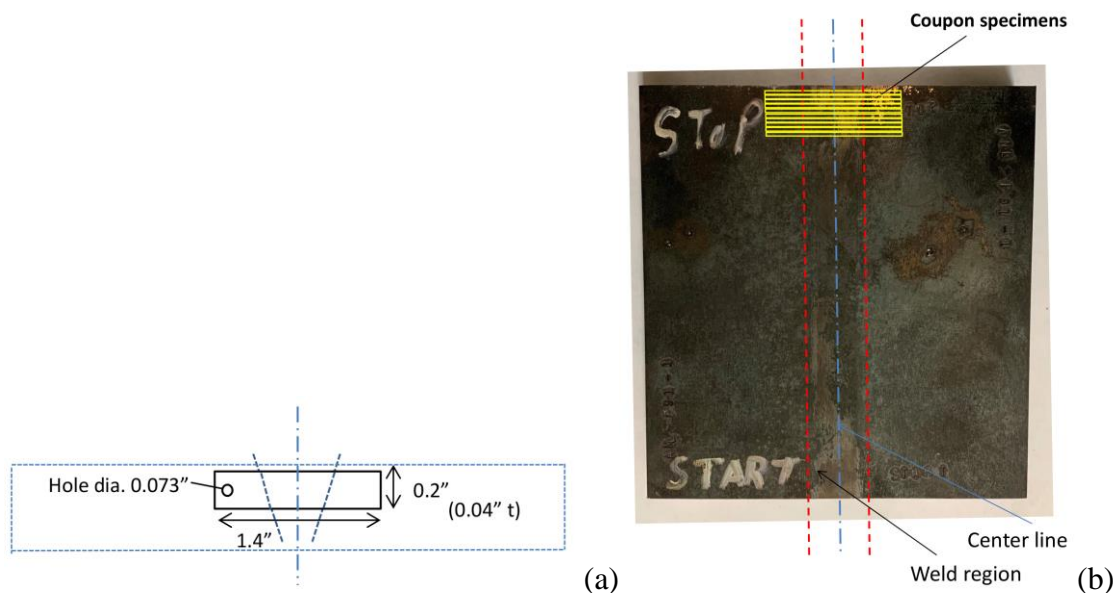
(a) A schematic drawing of coupon specimens and (b) fabrication drawing of coupon specimens made from the G91 weld plate (unit: inch).
